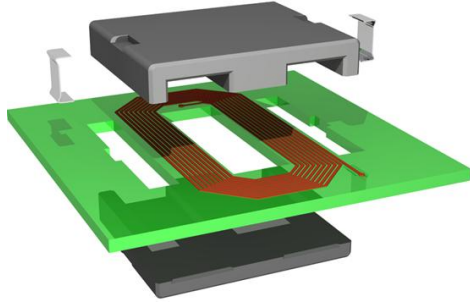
Exploded view of a planar inductor, showing the planar ferrite cores and the flat PCB windings [8]
